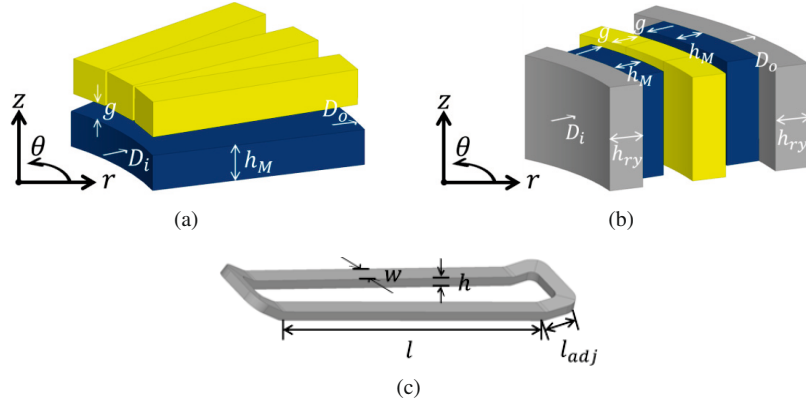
Coordinate system and machine geometry variables: (a) AF machines (1R-HA-AFPMG for example); (b) RF machines (2R-CA-RFPMG for example); (c) coil dimension.
